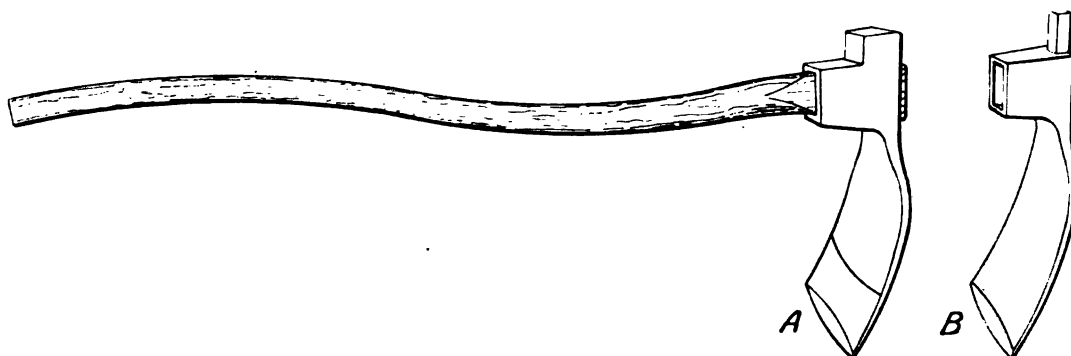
A. Wheeler's Adze. B. Carpenter's, and Joiner's ditto.
